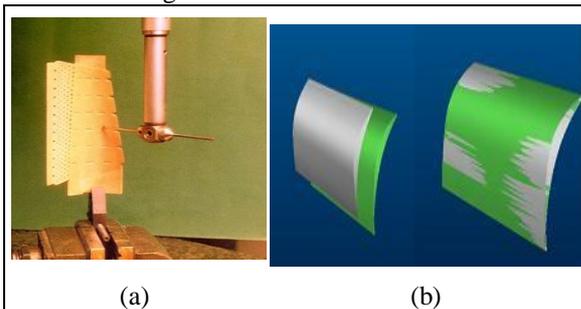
(a) CMM inspection of a fired core and (b) CAD based best-fit analysis
